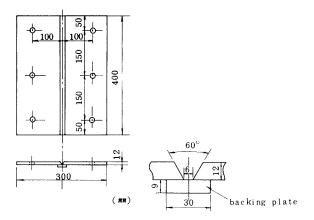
Specimen for test of groove welding under vibration.
